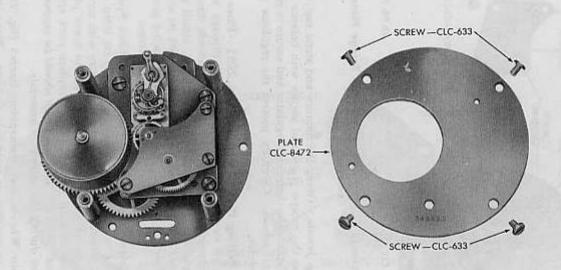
Message Center Clock M1 — Setting Mechanism Removed
